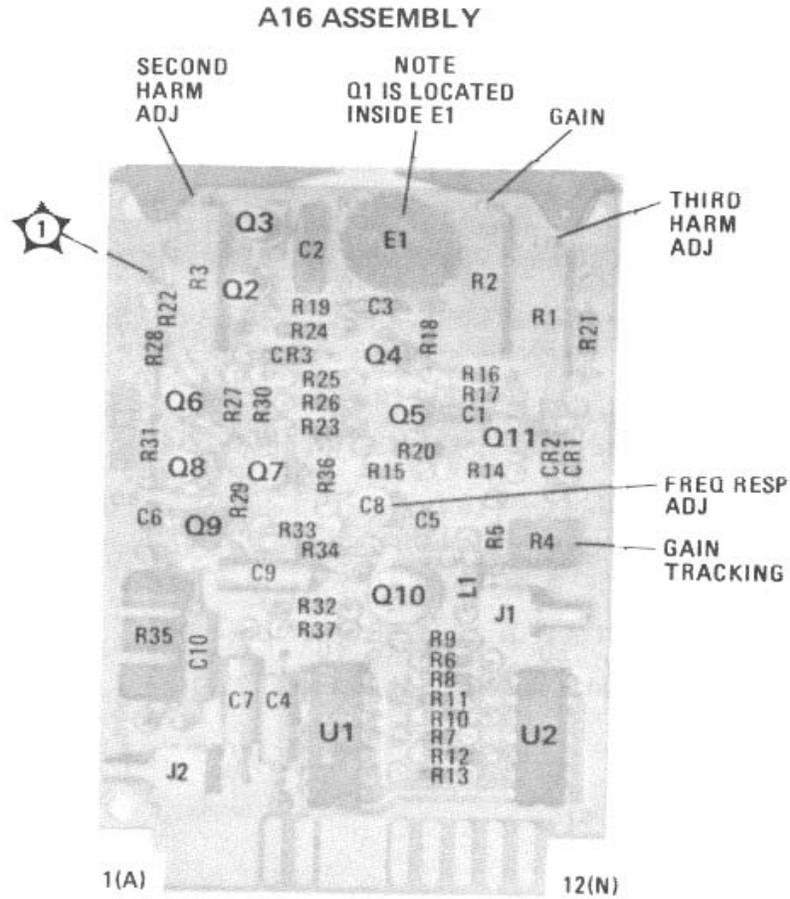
A16 Phase Modulator Driver Assembly Component and Test Point Locations (Change B
